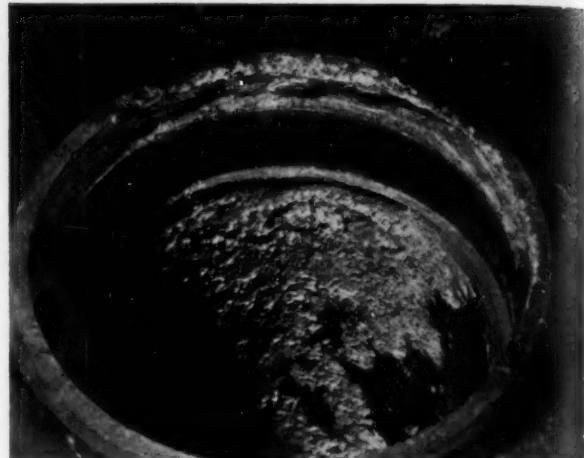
Severe corrosion of hub of magnesium accelerated by close proximity of steel axle and dissimilar metal contact of bearing race and bearing retainer snap ring. Note, however, absence of corrosion in bearing outer cone seat, which is unfinished. Apparently tight fit prevented access of water.
